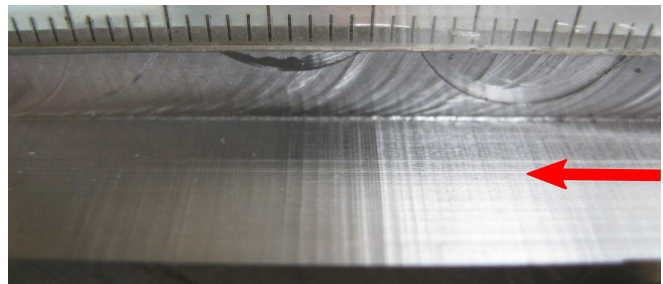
Workpiece after peripheral milling on the surface indicated by the red arrow, with compensation in the y -direction of the micro manipulator.
